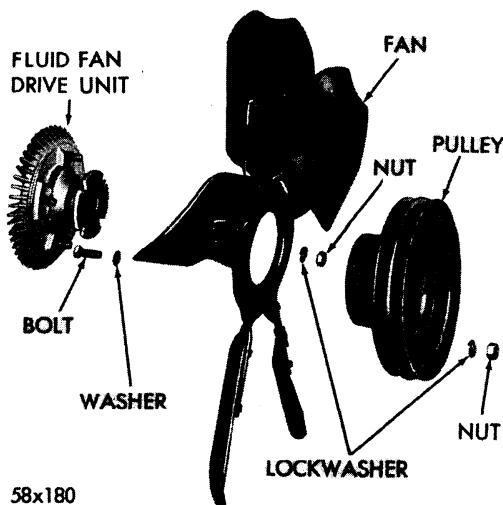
Silent Flite Fluid 5 Blade Fan Drive (Used On Air Conditioning Only) Exploded View
